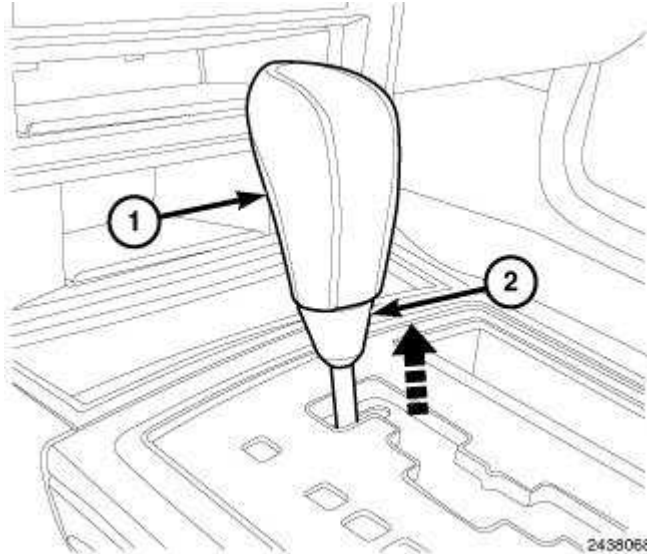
Seating Retaining Ring Up Onto Shifter Knob
